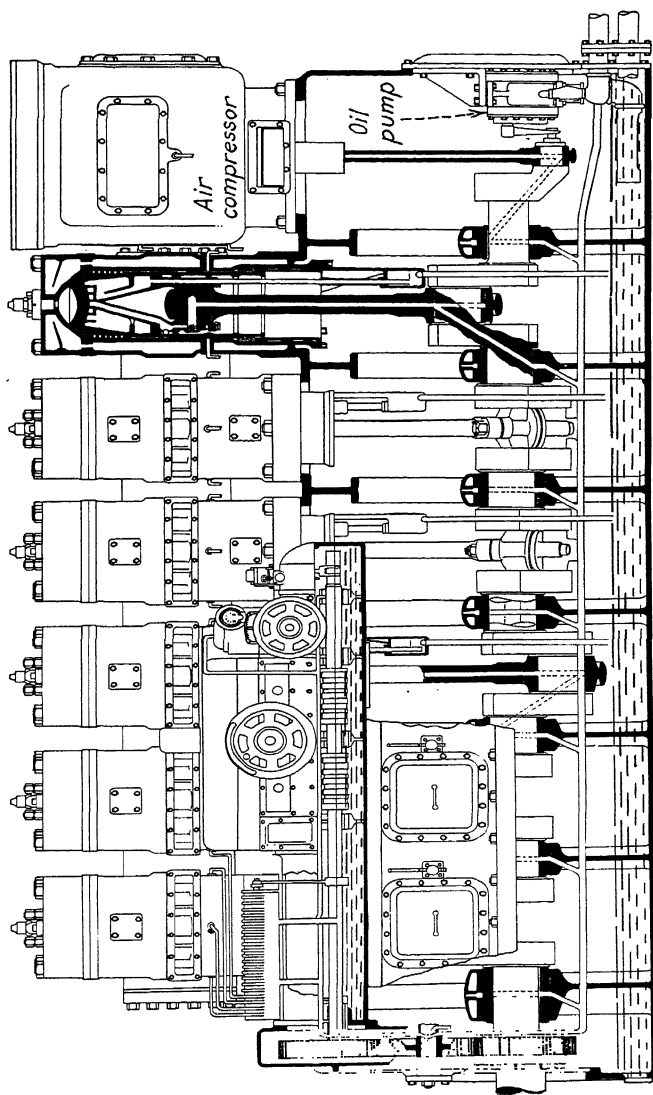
Lubricating system of a two-stroke-cycle, single-acting Diesel engine. (Courtesy Socony-Vacuum Oil Co.)
